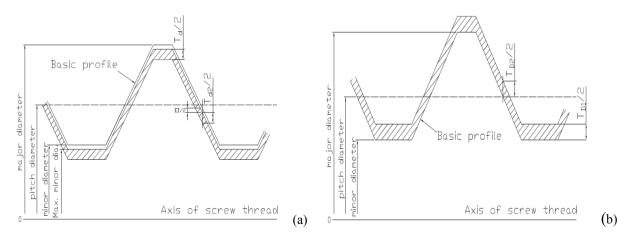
thread profiles for external and internal threads: a) tolerance position g for external threads; b) tolerance position H for internal threads
